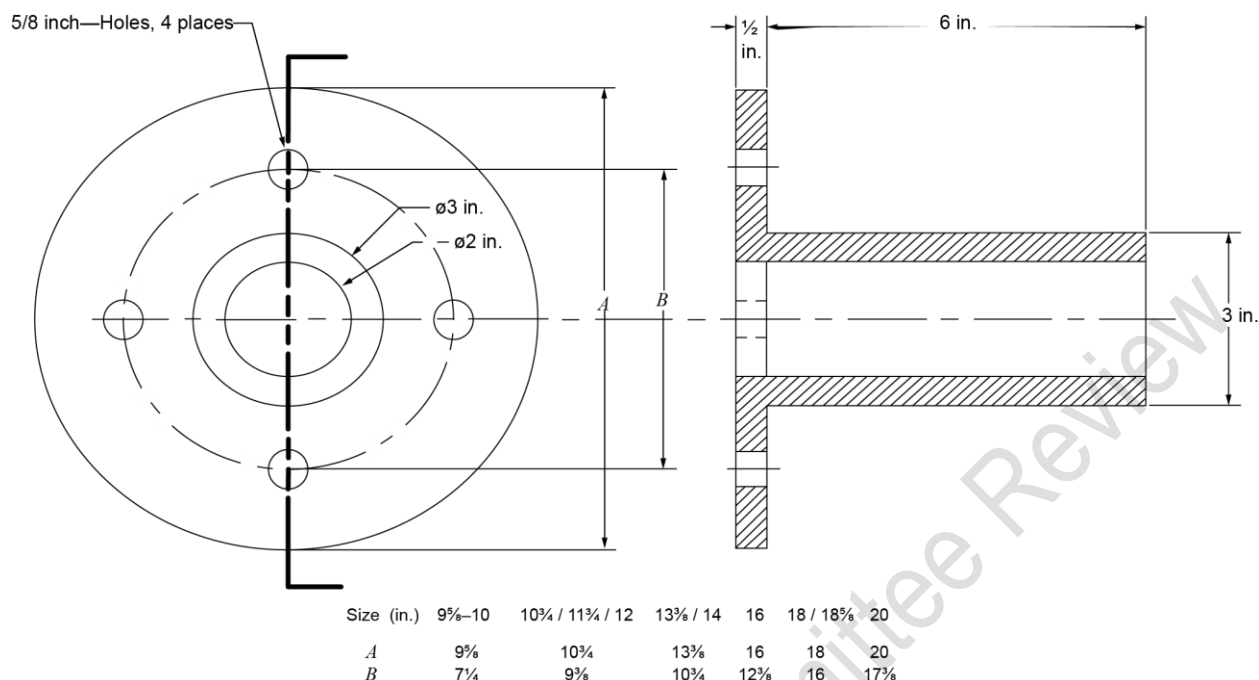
Bolt Circles and Back-up Plate Dimensions for Line Pipe, Buttress Casing and Short or Long Round Casing Master Plug Gauges
